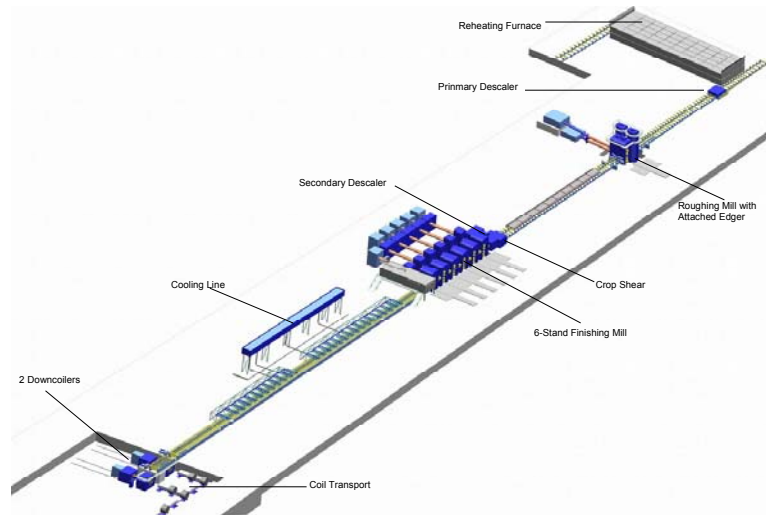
Layout of the Mittal Steel Poland Hot-Strip Mill
